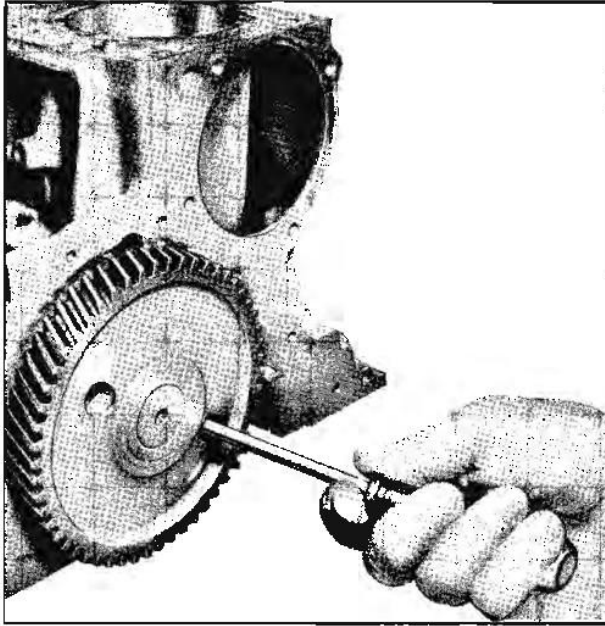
Removing Camshaft Thrust Plate Screws
